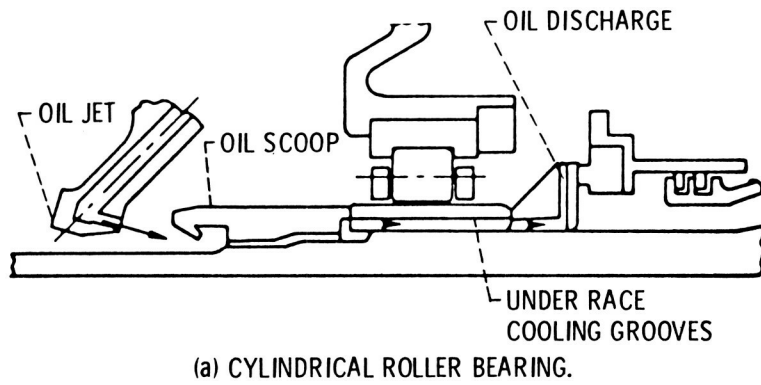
Under-race oiling system for main shaft bearings on turbofan engine. (From ref. 1.)
